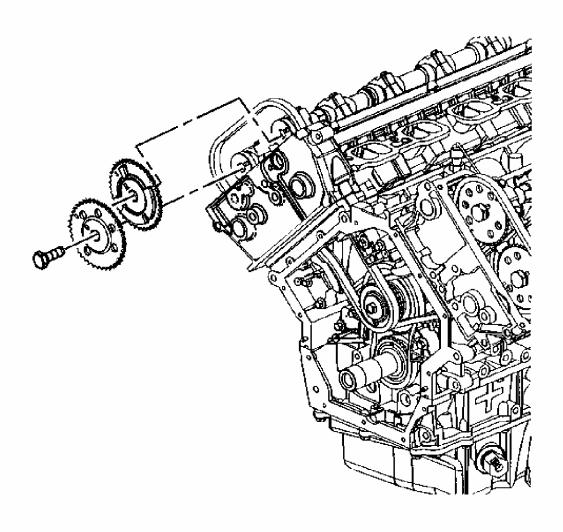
Identifying Camshaft Sprocket Courtesy of GENERAL MOTORS CORP.
